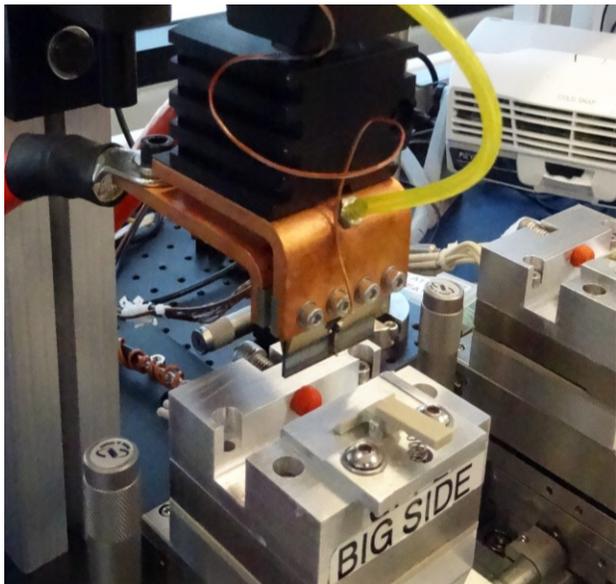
Hot Bar Process shown). The soldering bar is heated by high current from a power supply (see thick gage wire) and then it presses on the device terminals in the fixture. The hot bar process is utilized for several key process steps during the assembly of the high speed fiber optic transceiver module. These process steps involve attaching flexible circuits directly to the sensitive device and also to a PCB. This process step is where the device would be most vulnerable due to the direct contact of the soldering bar to the input pads of the device. The process creates metal-to-metal contact which is capable of conducting excessive currents into device.
